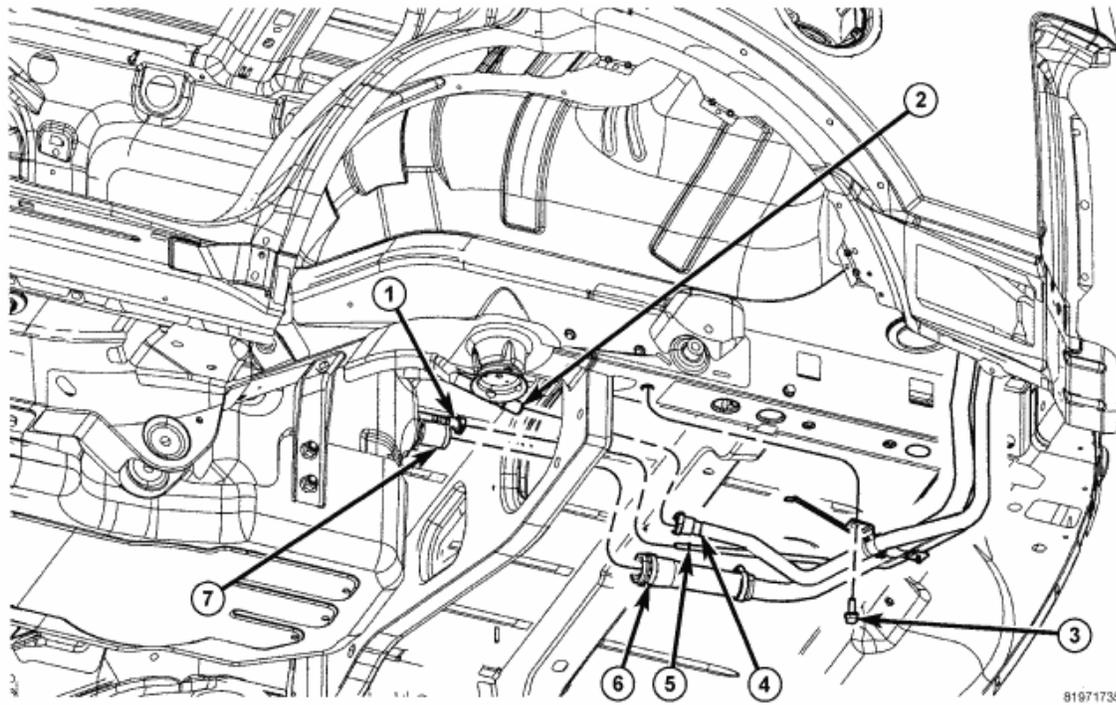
Disconnecting/Connecting Vapor Lines And At Rear Of Tank & Fuel Fill Hose And Clamp At Rear Of Tank
